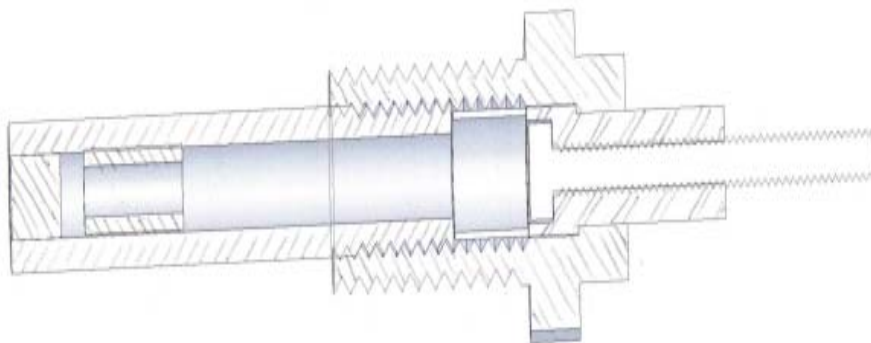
Sensor Cross-sectional view. The brass probe is on the left. It's threaded 1/4 x 28. On the far right is the 2 x 56 bolt which acts as the terminal that connects to your gauge. The small collar on the left conducts the heat to the thermistor. The brass plug at the far left is knotted to pinch the wire acting as a ground and holds everything together. Excess wire is cut off.
